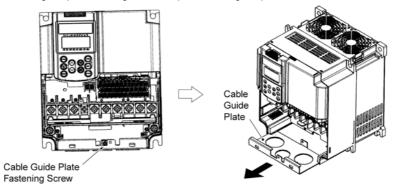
Removing the Cable Guide Plate (FRN015F1S-2U)
